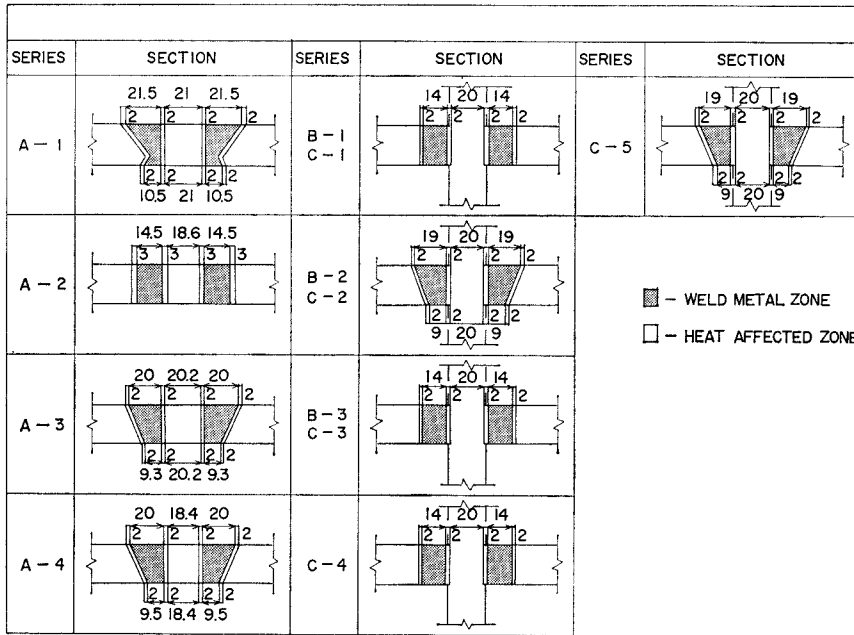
Weld Metal and Heat Affected Zones (Unit: mm)
